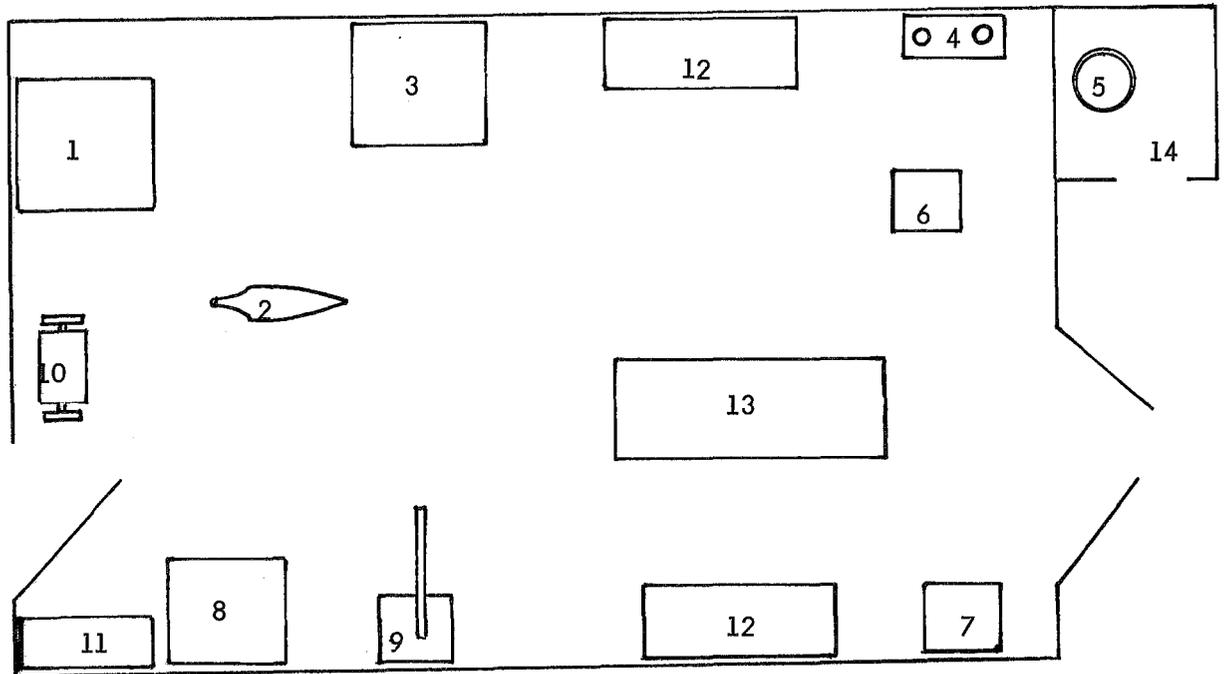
Layout of equipment in the forging/welding sub-unit
